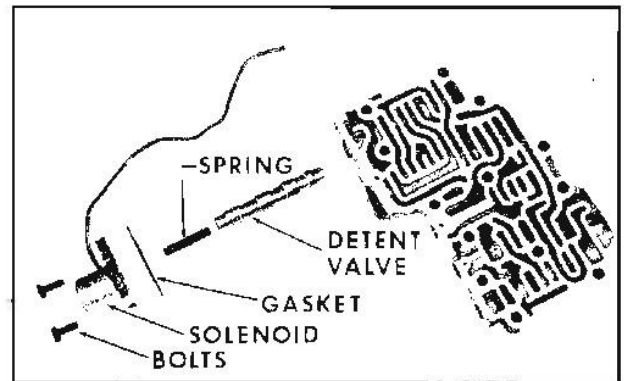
B-48 Downshift Solenoid and Detent Valve - Exploded View
